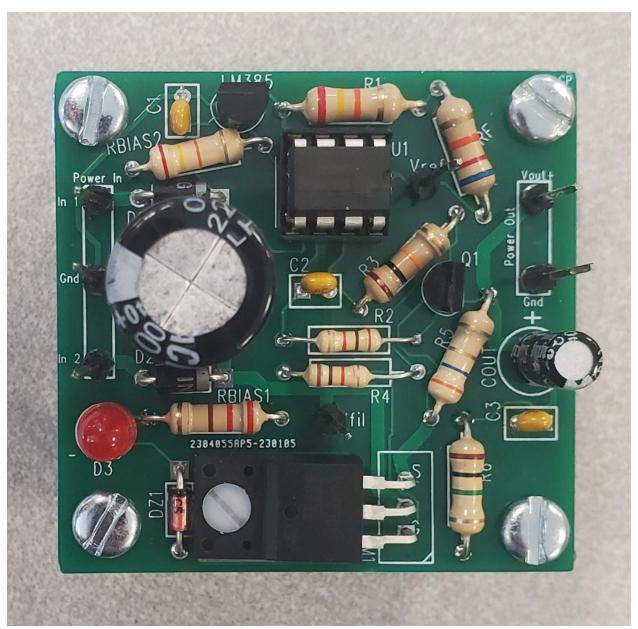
Completed DC Output Power Supply built on custom PCB with all components mounted and tested.
